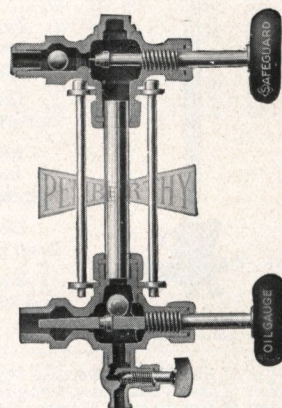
Safeguard Oil Gauge for Pressure Tanks
